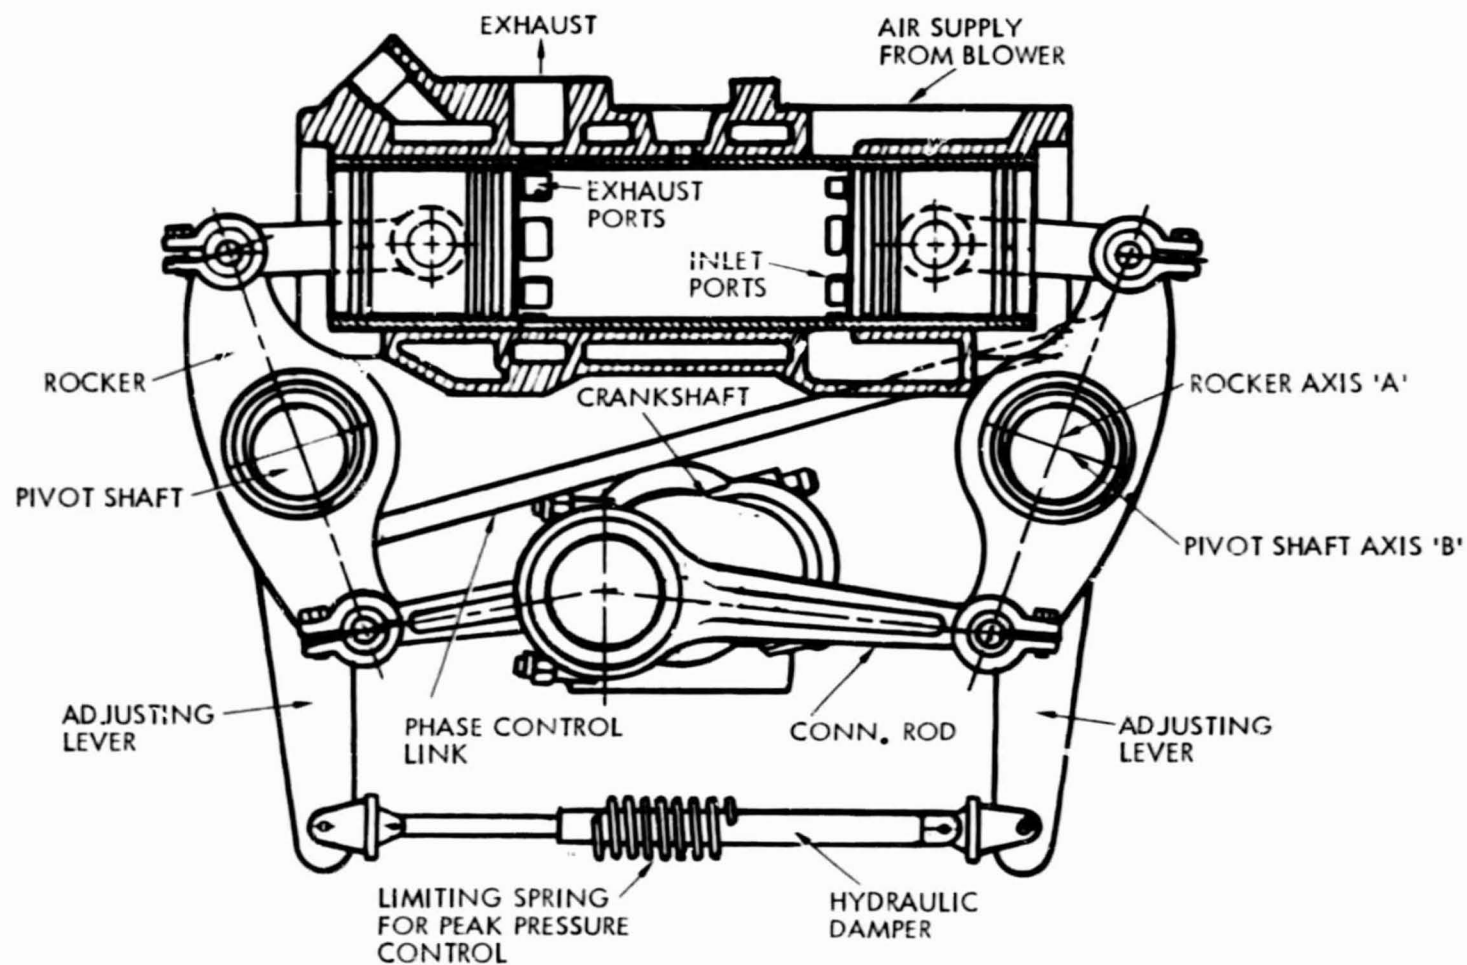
V.C.R. Opposed Piston Engine (Ref. 50)
